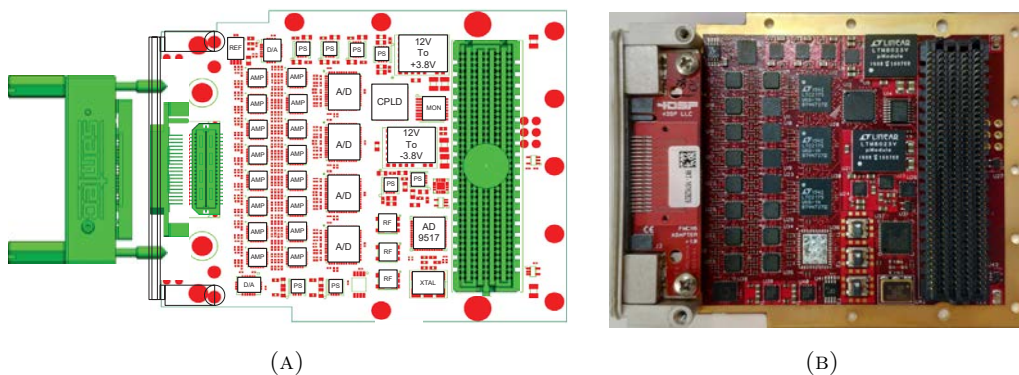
Abaco FMC112 Board: components layout (2.9a) and board view (2.9b).
